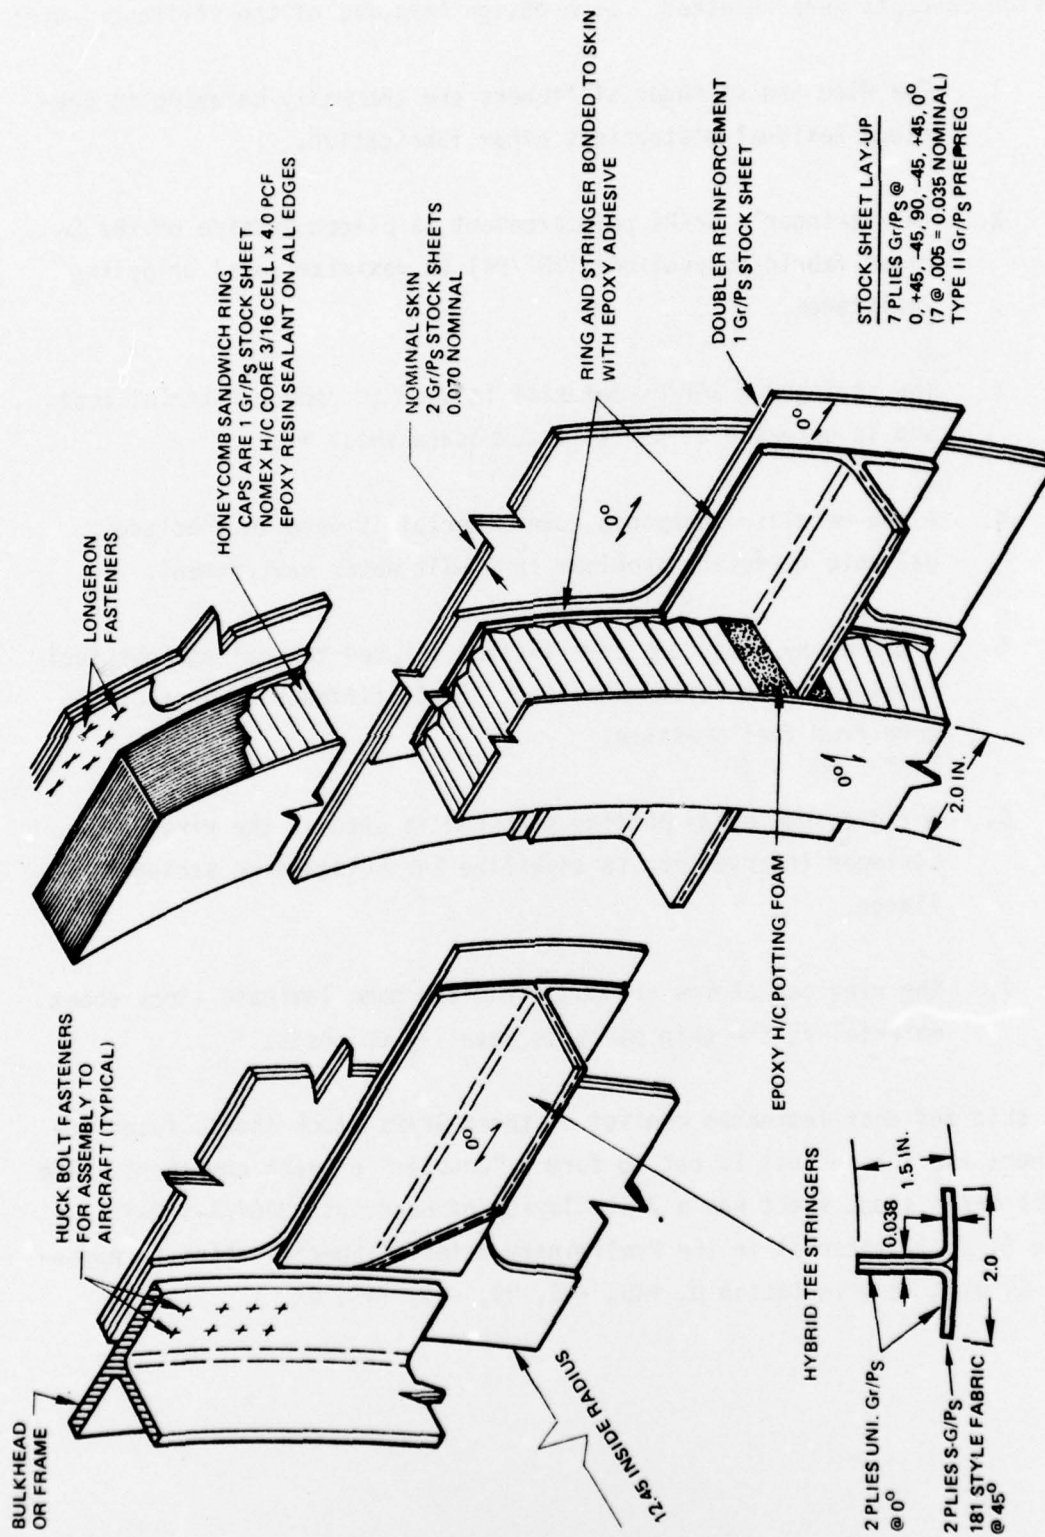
Prototype Gr/Ps Component Design Concept Details
